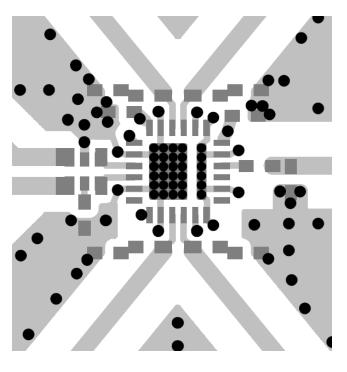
Enlarged View of the Component Side of the Evaluation Board
